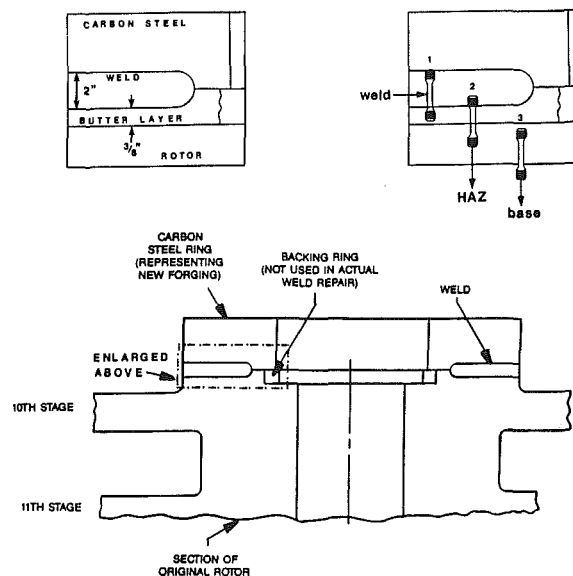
Sketch of the test rotor weld repair and location of test specimens
